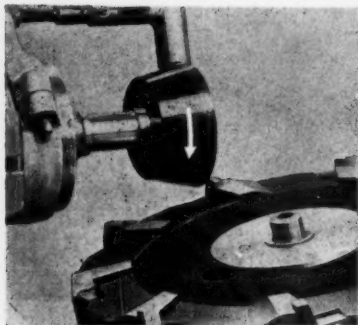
(top left) Set-up for Lapping the Front Surface of a Face Milling Cutter Blade
